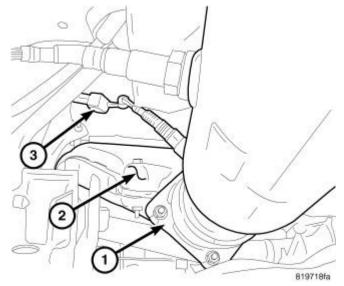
Crankshaft Position Sensor (CKP) Wiring Harness Connector Courtesy of CHRYSLER GROUP, LLC
